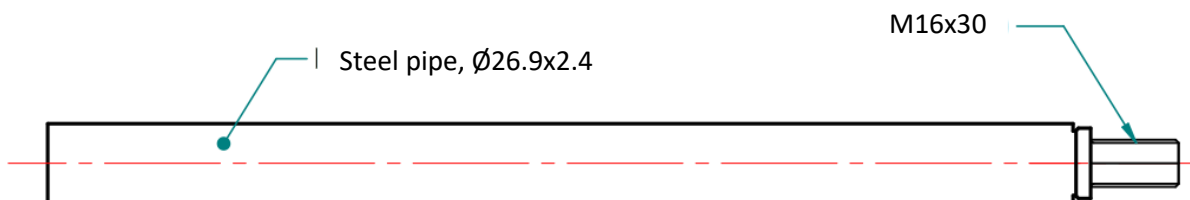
Steel accessory application nozzle screwed into the connector with a threaded nut
